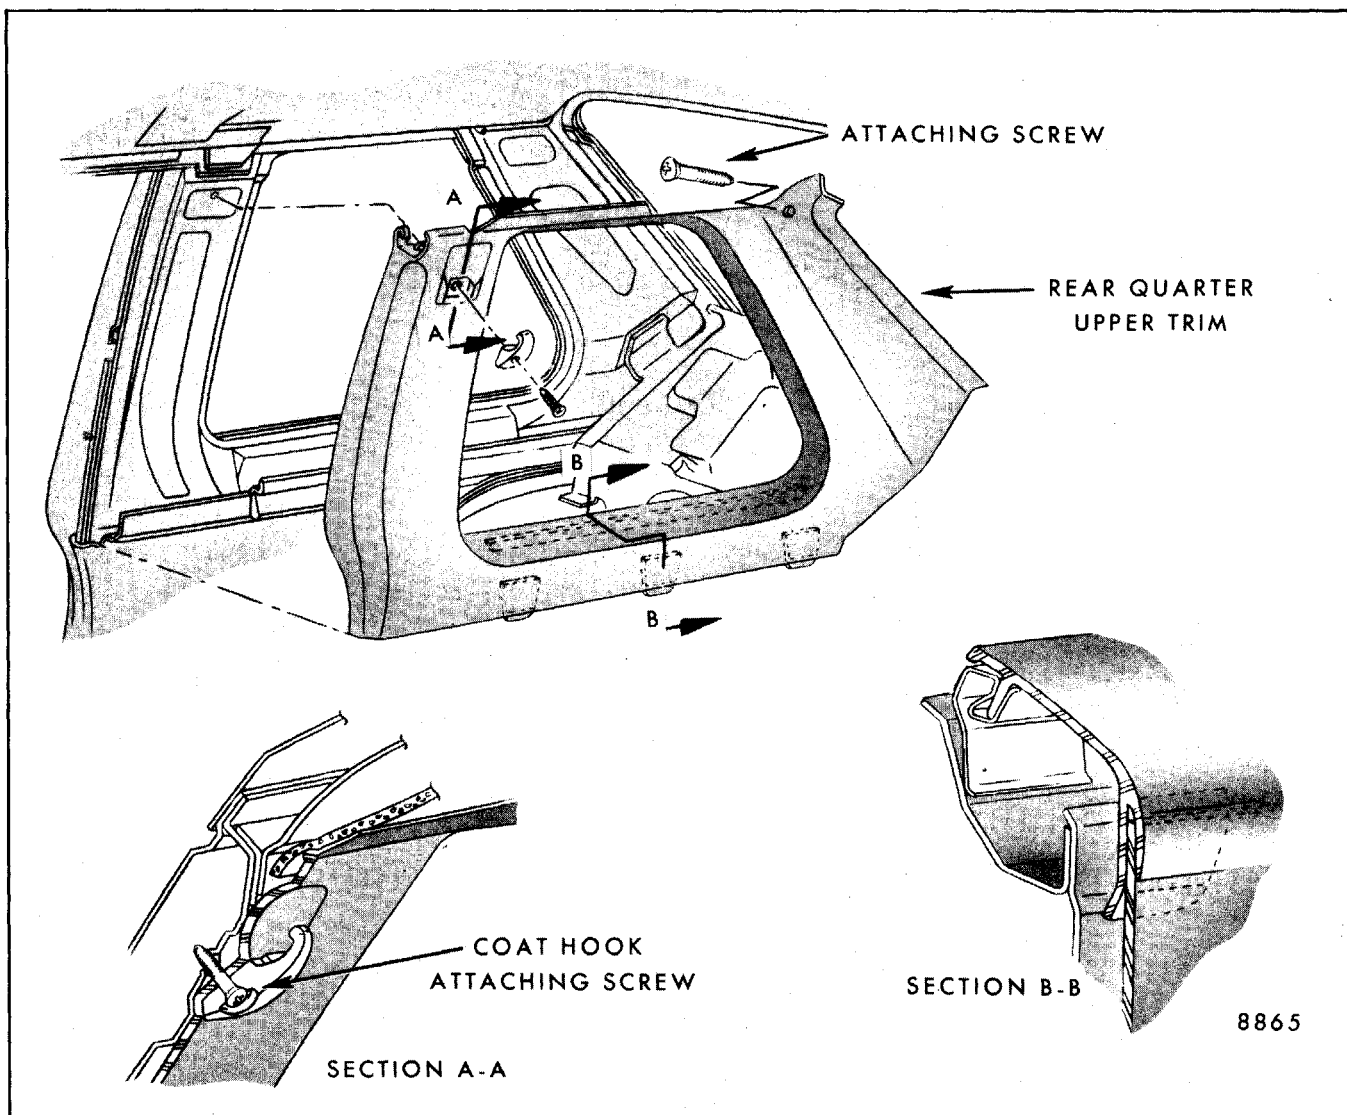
Quarter Upper Trim Attachment - "H-27 and A-57" Styles
